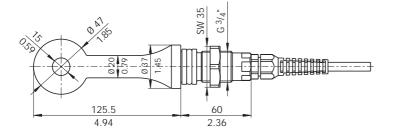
Dimension drawing InPro 7250 electrodeless conductivity sensors
